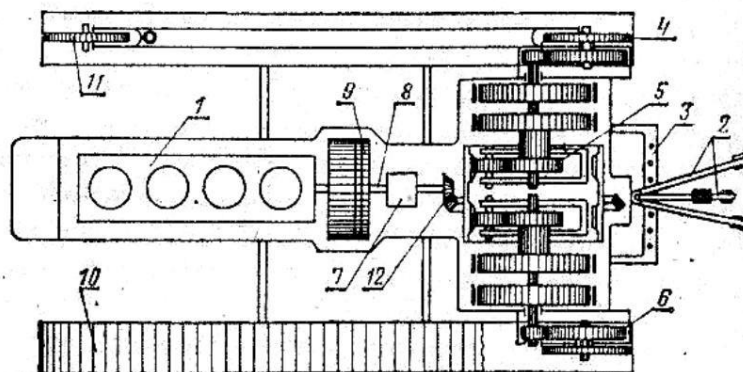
Layout of the main parts and mechanisms of the DT-75M tracked tractor. 1-engine; 2-lifting system; 3-
